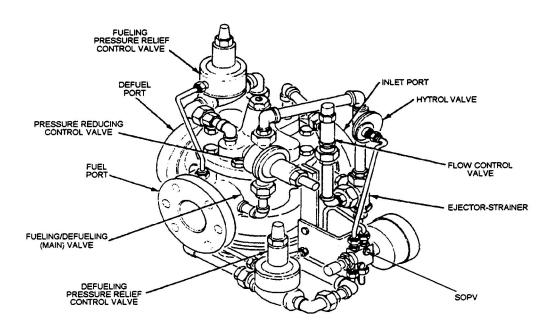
Cla-Val fuel/defuel valve assembly.
